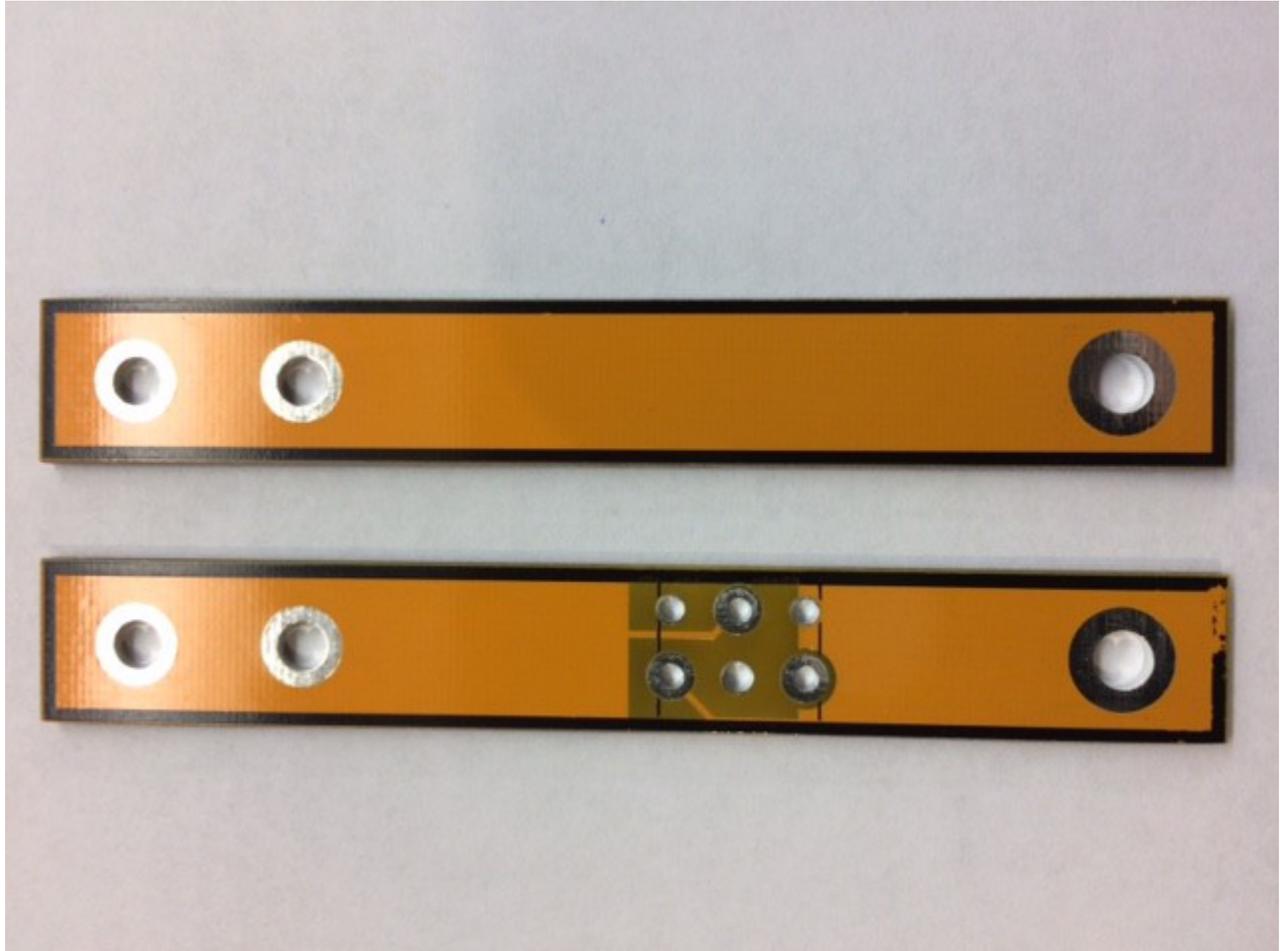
Key Strip (top) and Keying Adaptor (bottom) – Mounting holes on left, keying knob holes on the right.
